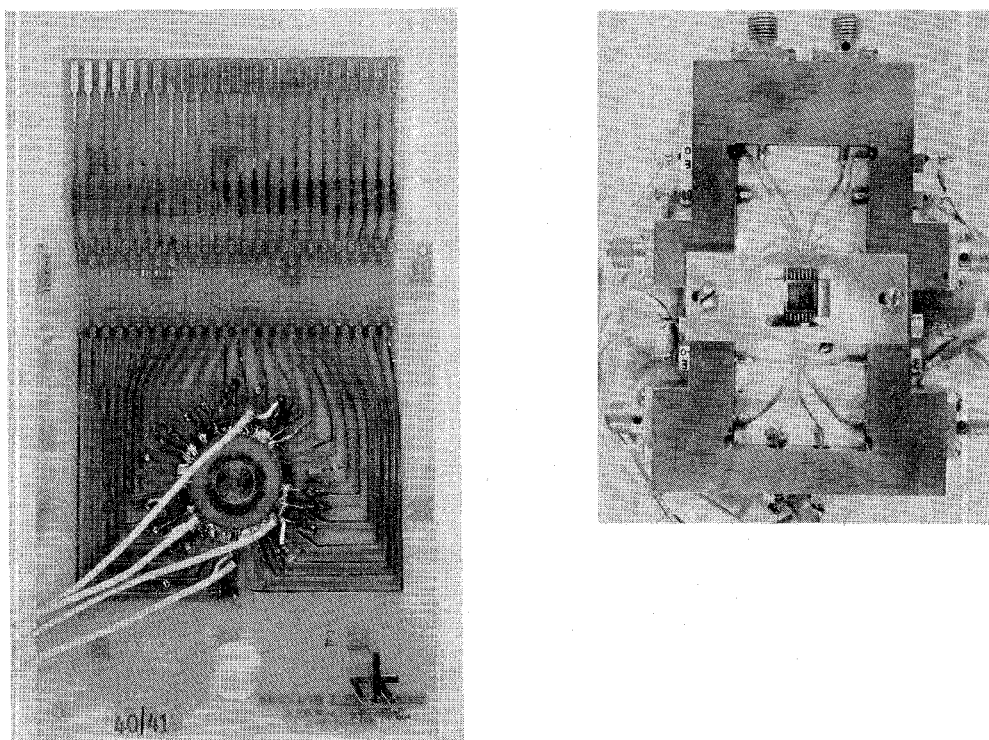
Left: Probe card modified for high-speed testing. Right: Test jig for packaged device evaluation.
